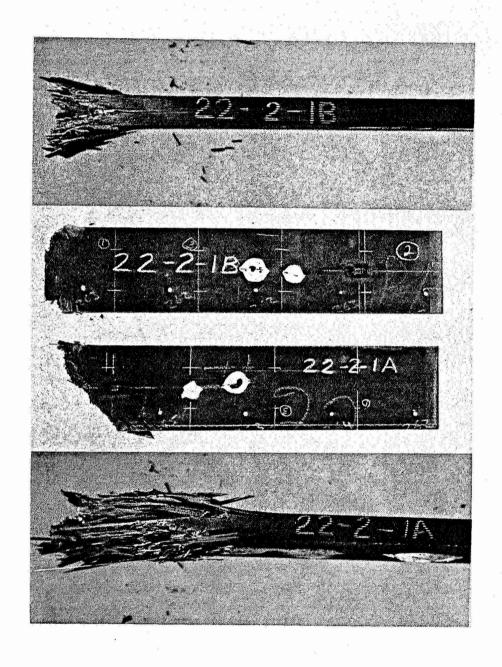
Typical Compression Failures of 2 Inch Wide 0° Specimens on AS4/3502 Using the V-Groove Compression Fixture.
